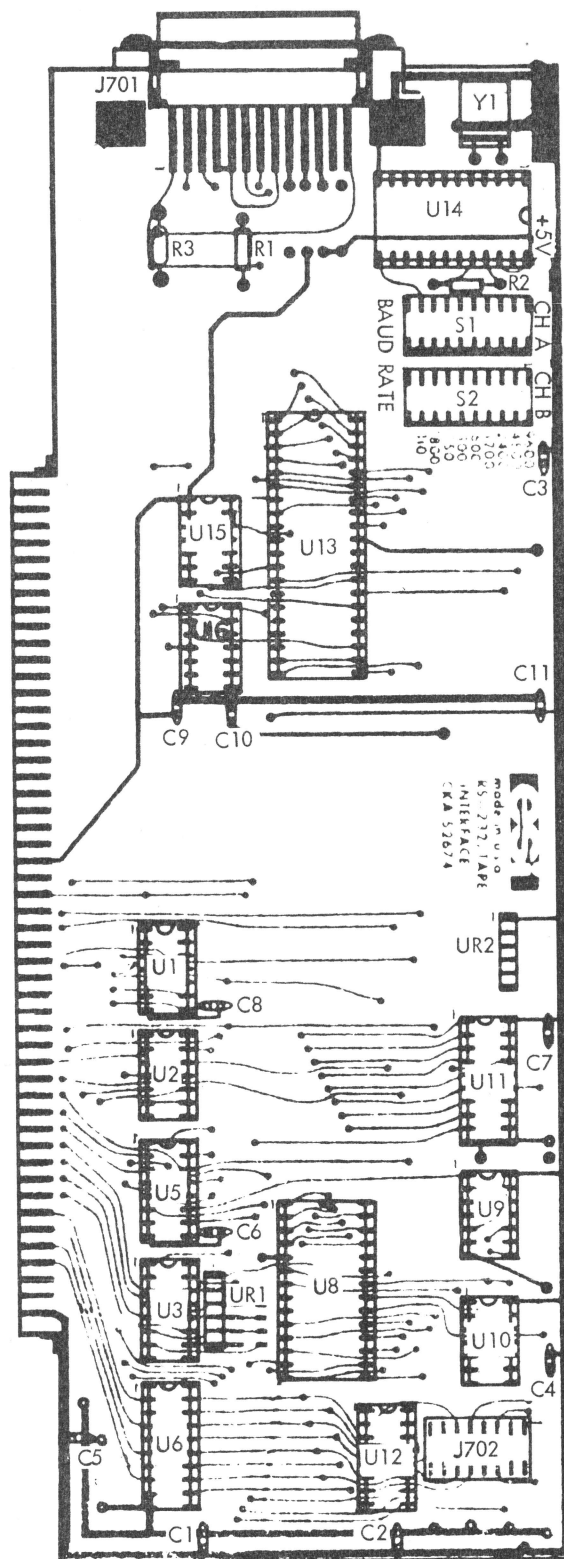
RS-232/Cassette Interface (optional on 2150) Circuit Assembly (P/N 52674)
